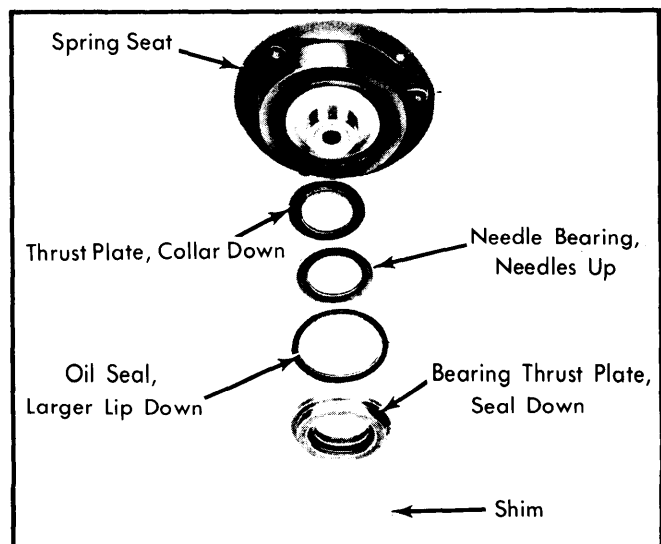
Components That Mount on Top of Shock Absorber Piston Rod
